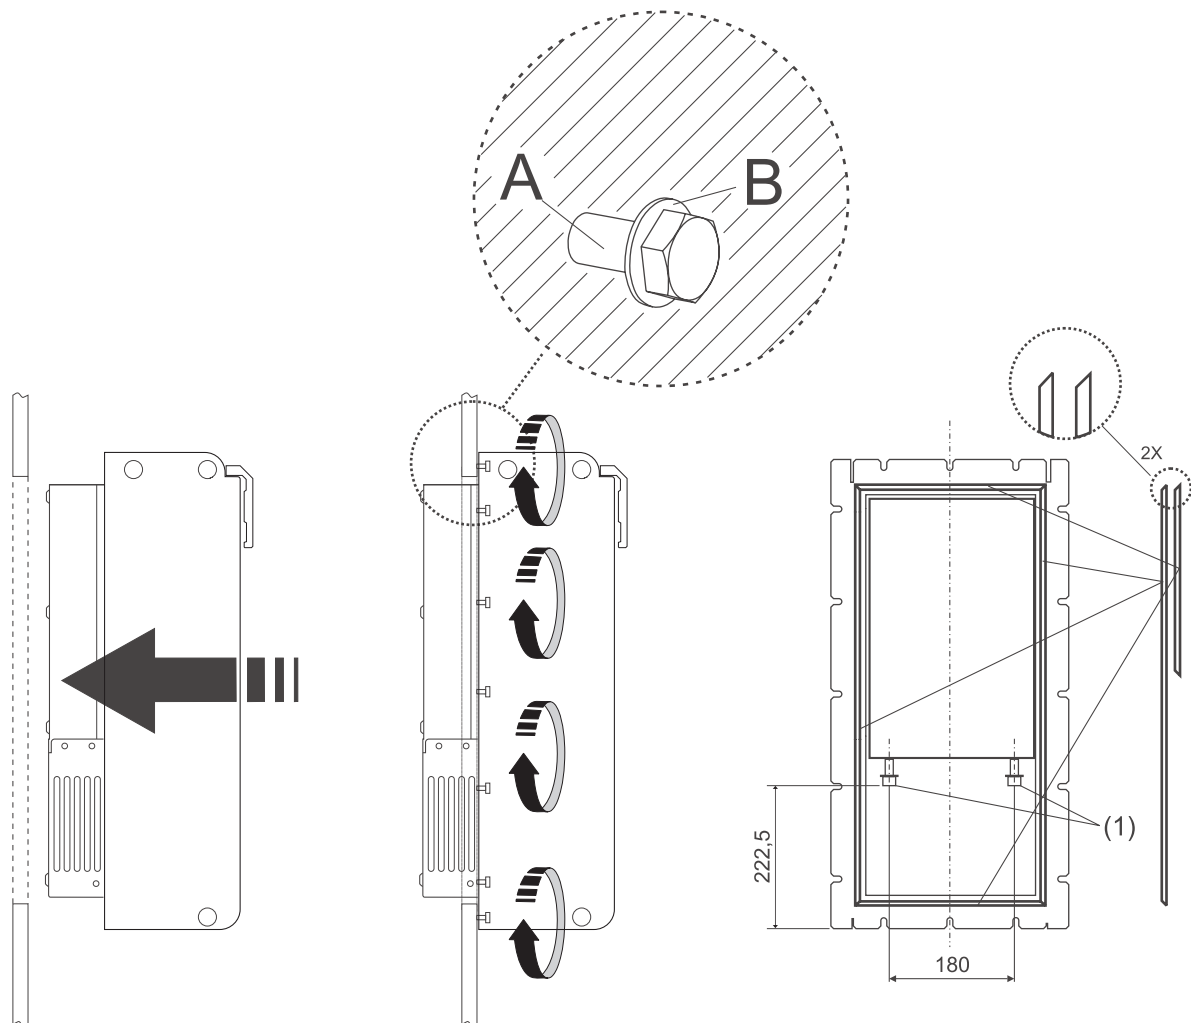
Mounting instruction BUM64 through-hole variant A/F
